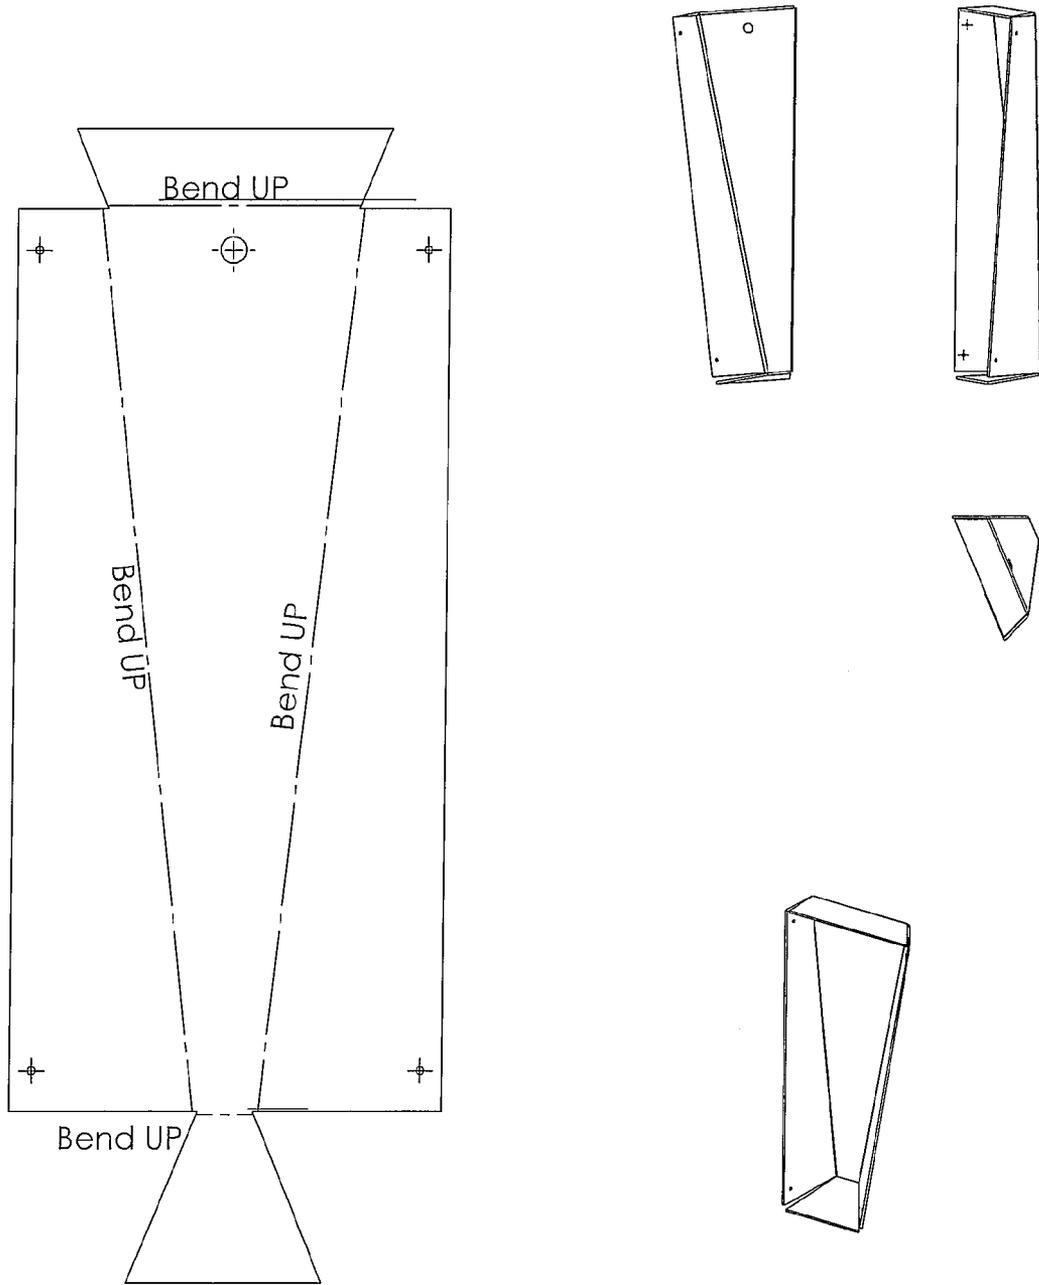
Heatsink for 8 sided assembly - 16.7 degree tilt
